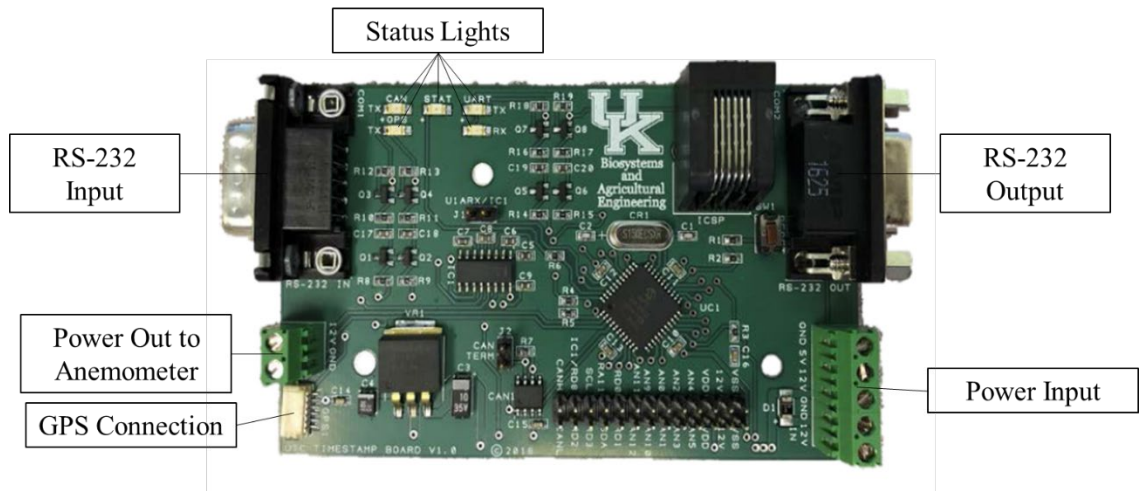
The assembled PCB allows a hardware method of timestamping
